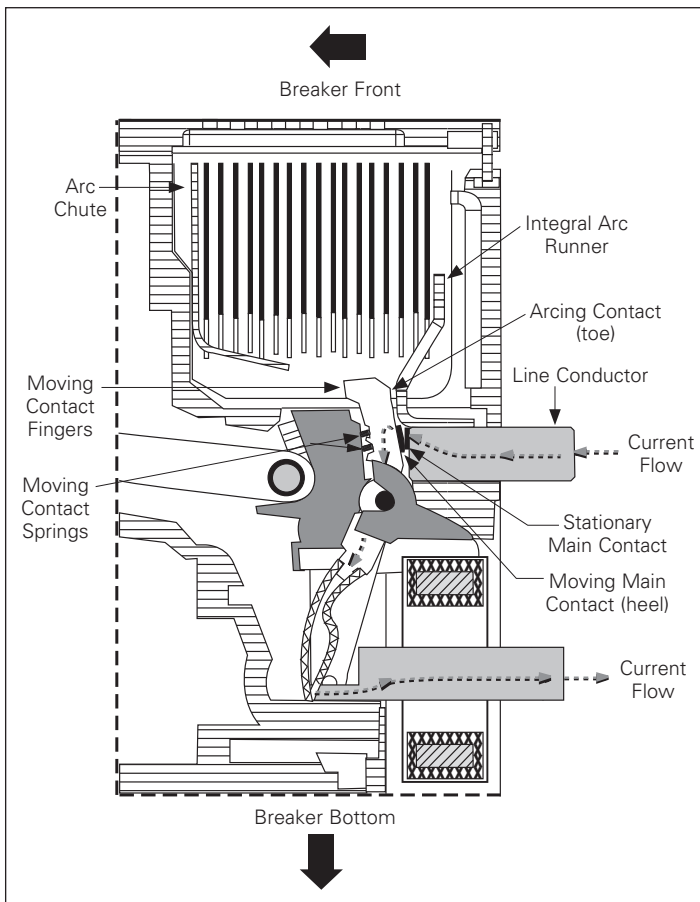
IZM97 and IZM32 (12-Finger) Moving Conductor Assembly
